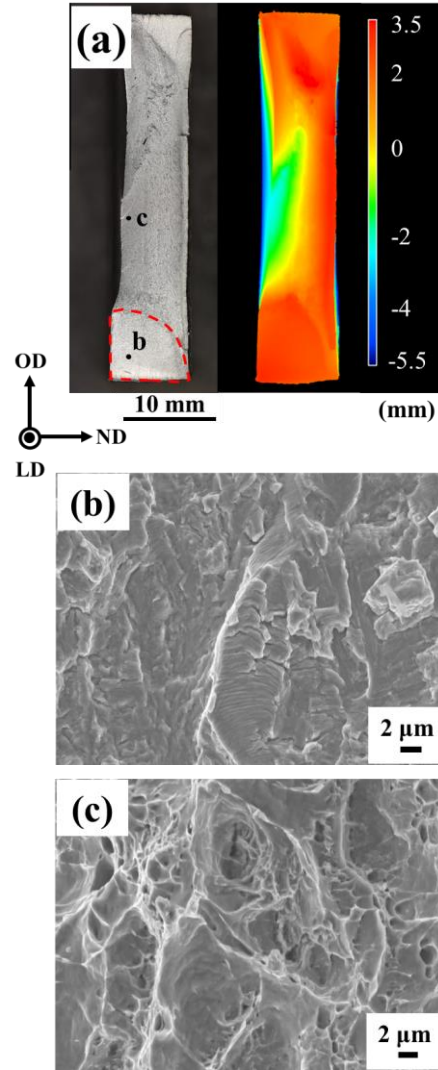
Fractured surface morphology of 50→50MPa joint after fatigue test: (a) Fracture surfaces and height distribution of joint; (b)-(c) SEM observation of fracture surface ($\Delta\sigma = 380$ MPa, $N_f = 52,084$, Red dotted line illustrated the fatigue fracture surface with striation).
